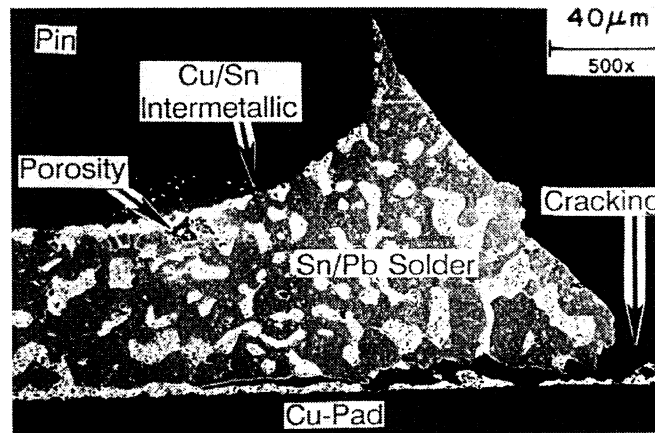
Cracks at the interface between Cu-pad and solder (Ref: [23], p. 78.).
